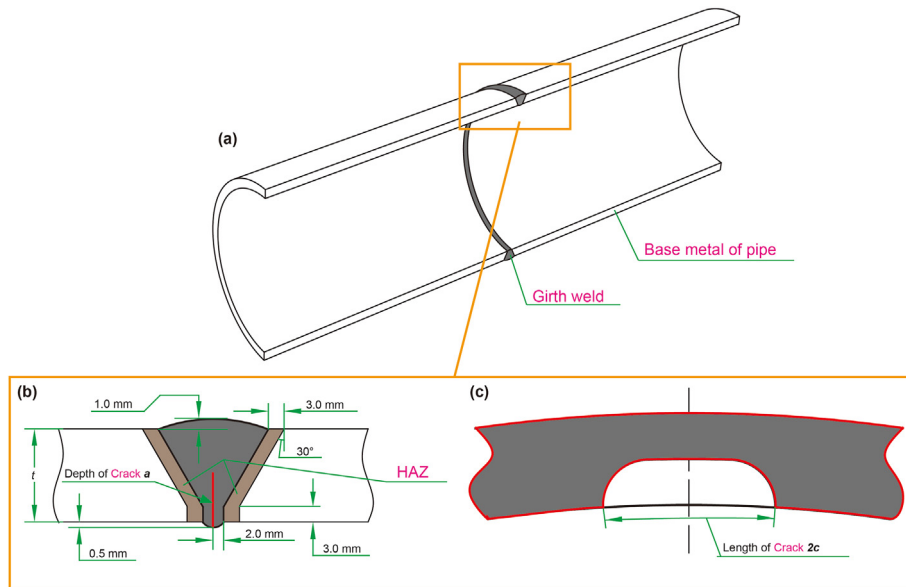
Geometries of pipe and girth weld: pipe with girth weld (a), the single-V groove weld joint with crack (b) and the crack of constant depth (c).
